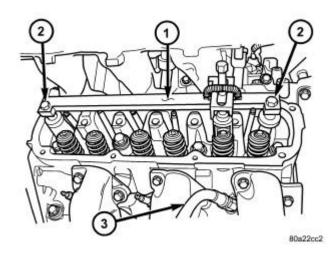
VALVE SPRING - REMOVE/INSTALL (HEAD ON) Courtesy of CHRYSLER LLC
